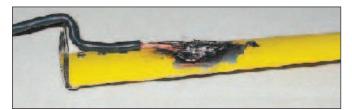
Stranded hookup wire, #14 AWG, soldered to bare metal area.
